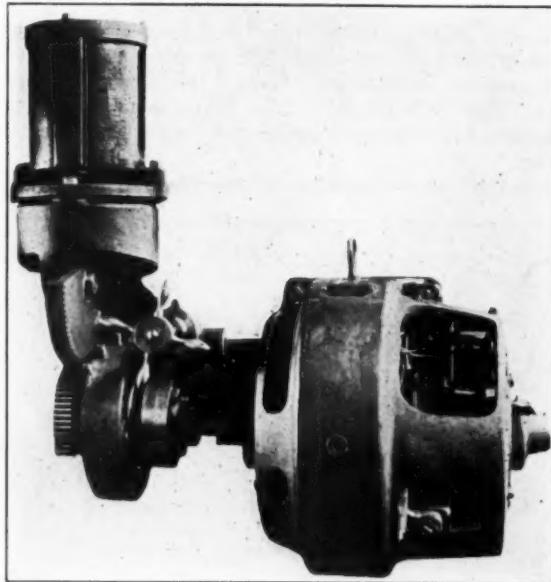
AUXILIARY MOTOR AND SOLENOID FEED MECHANISM FOR PLANER SHOWN IN FIG. 12
